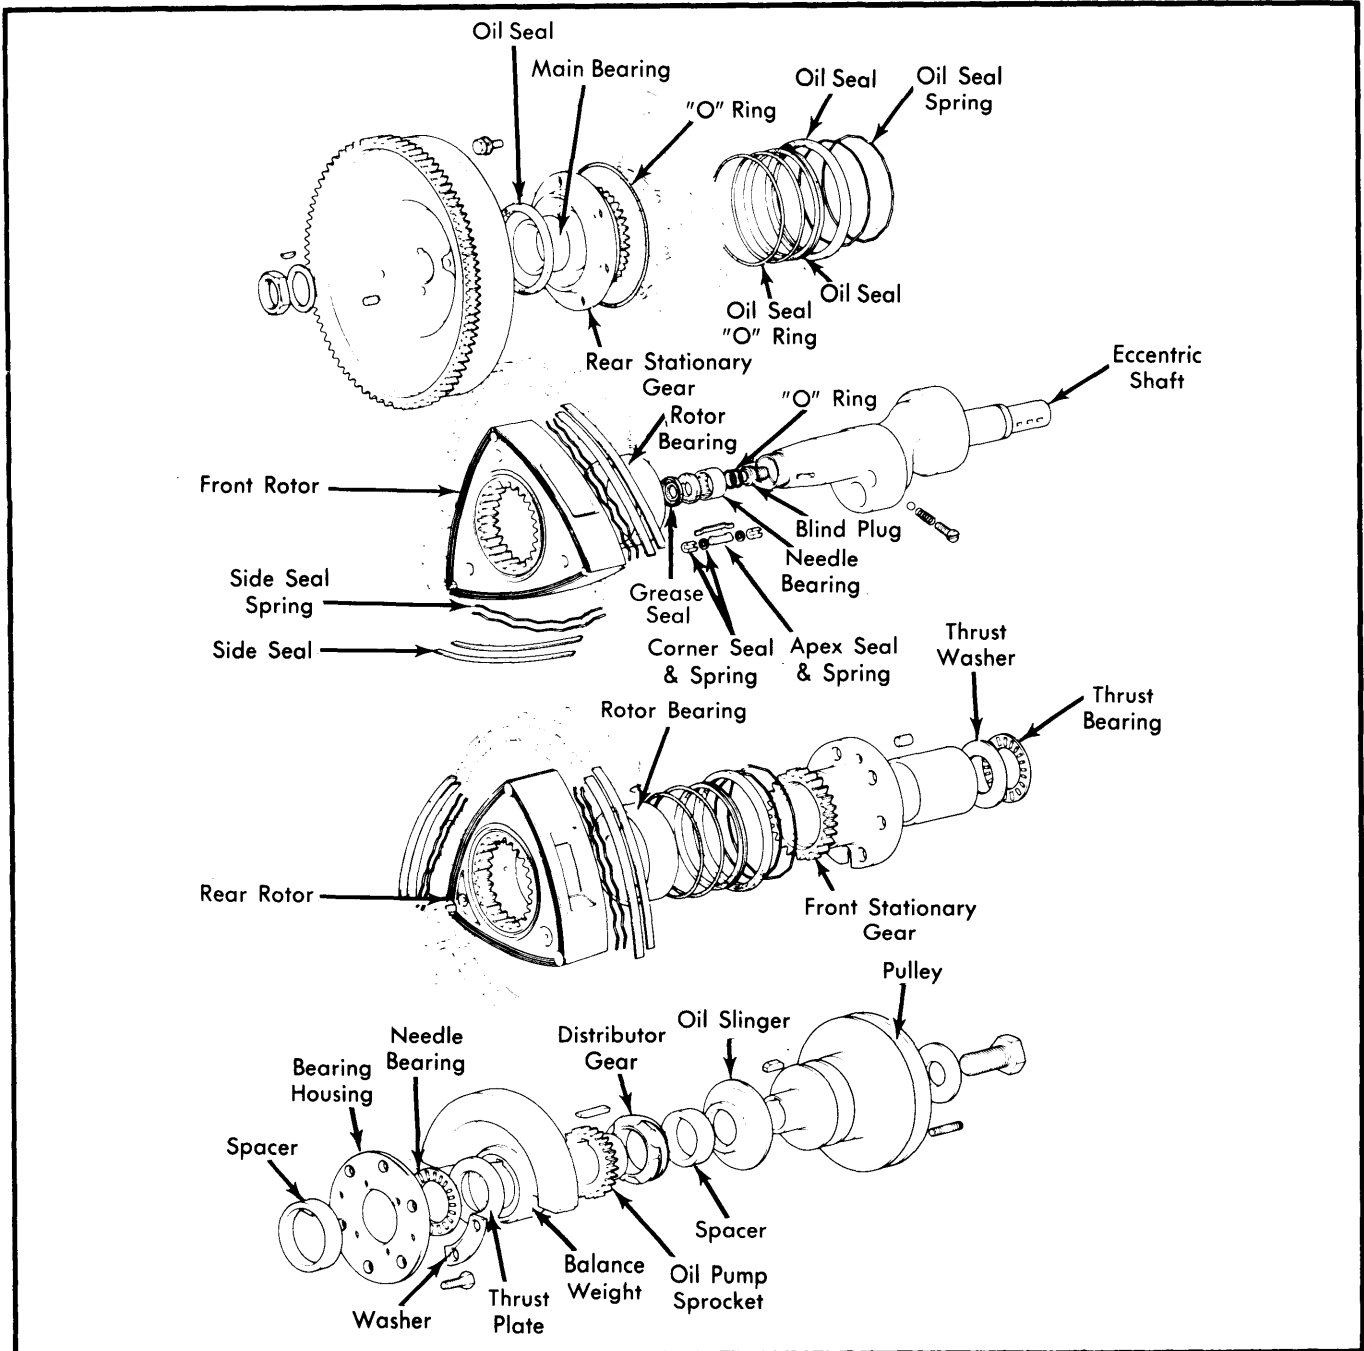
Exploded View of Rotors & Eccentric Shaft Assembly
